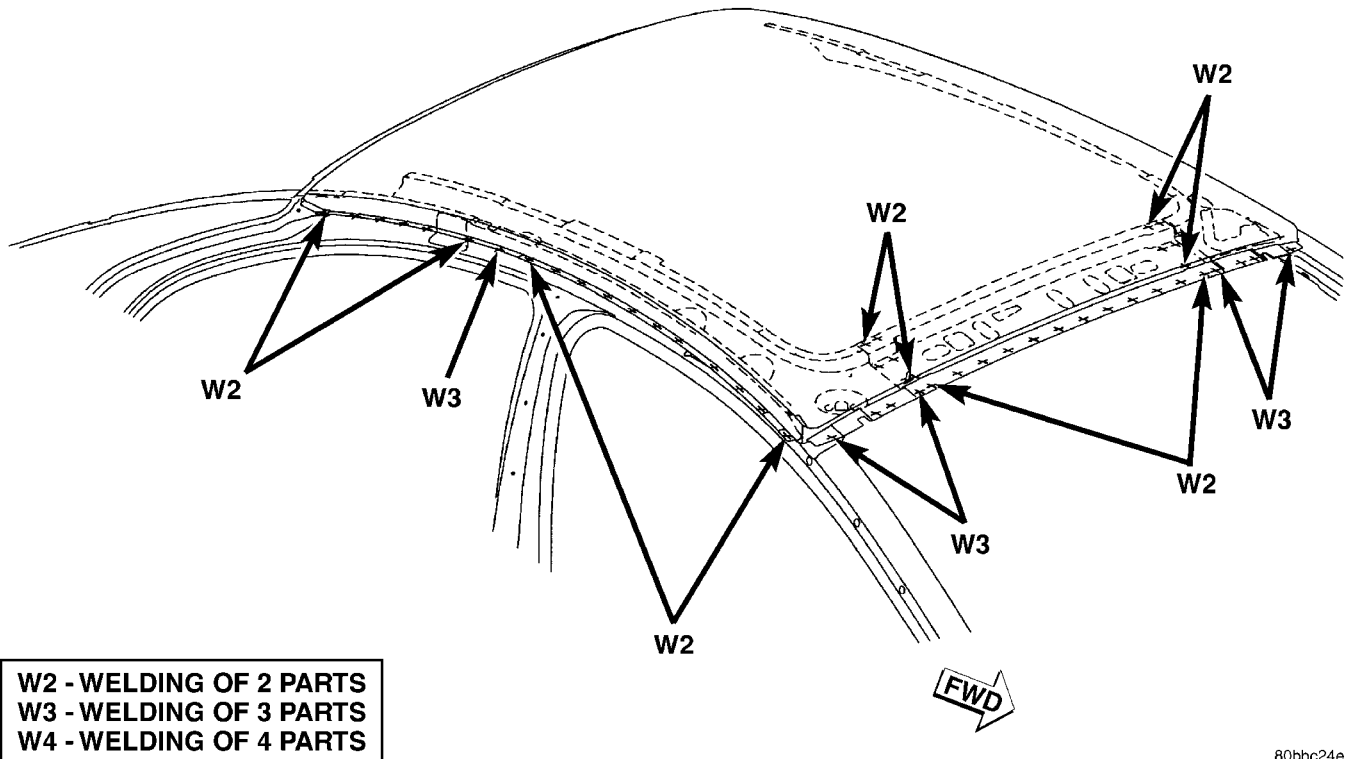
OUTER BODY SIDE APERTURE TO ROOF PANEL AND ROOF RAILS
